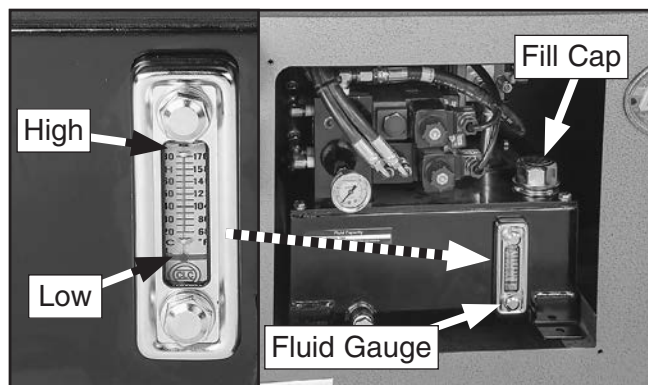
Hydraulic tank fluid gauge and fill cap location.
